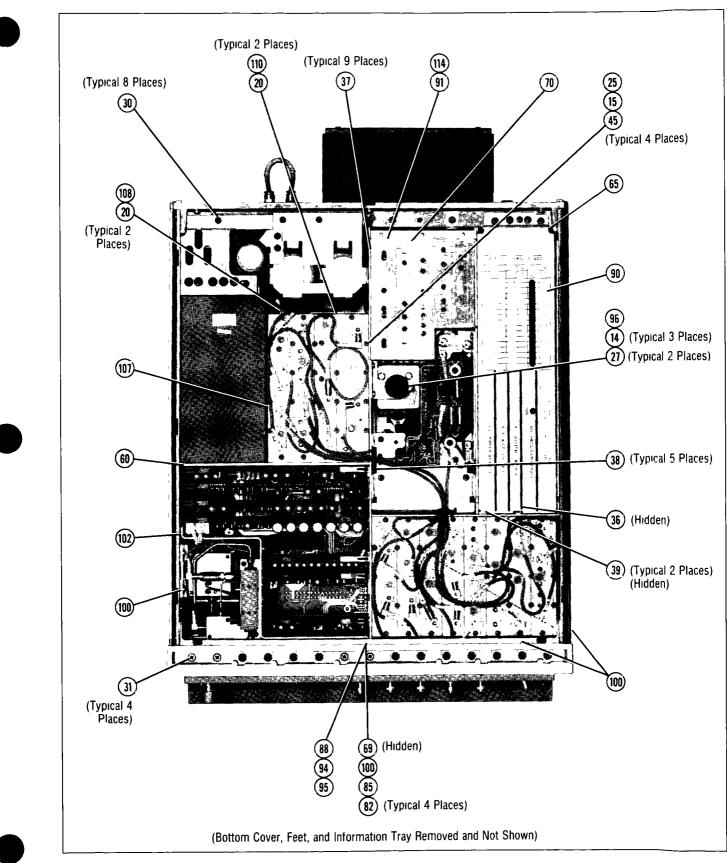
Miscellaneous Mechanical & Chassis Parts (5 of 6)
